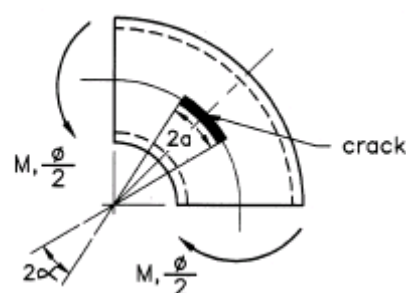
Sketch of elbow with through wall axial crack at the crown
